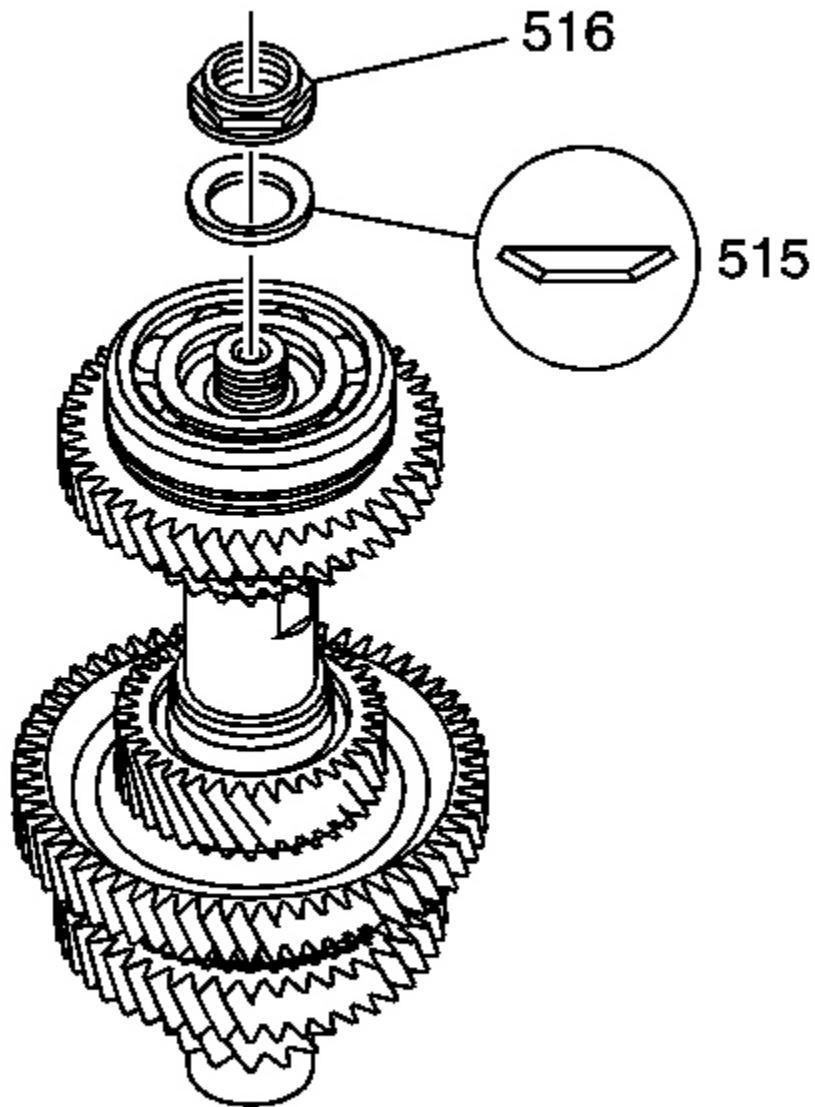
Installing Output Shaft Washer & Retaining Nut
